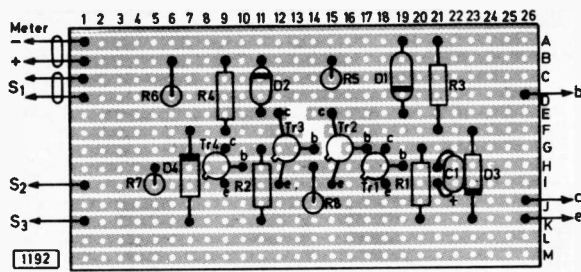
Component layout and external connections for the circuit board used in the prototype. There are three breaks to be cut in the copper strip pattern. These occur at locations E13, F14 and G15.
